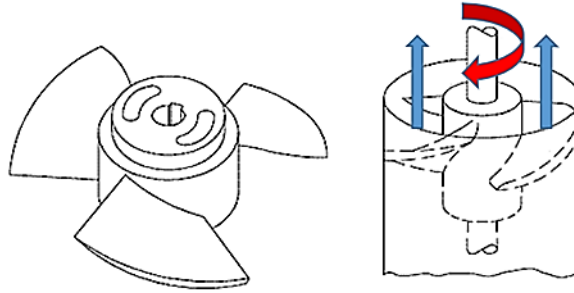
Axial flow impeller. (Engineersedge, 2012b)
